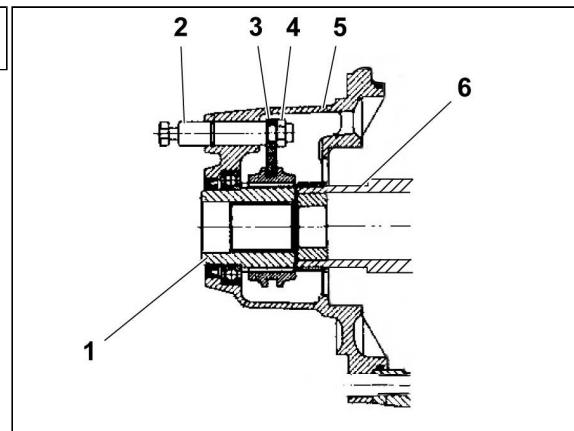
Removal of the front drive shift mechanism cover - 2
